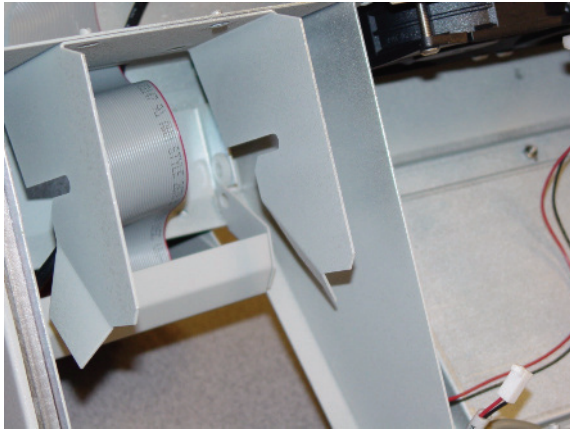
Re-installing the printer assembly with the Touch & Go device
